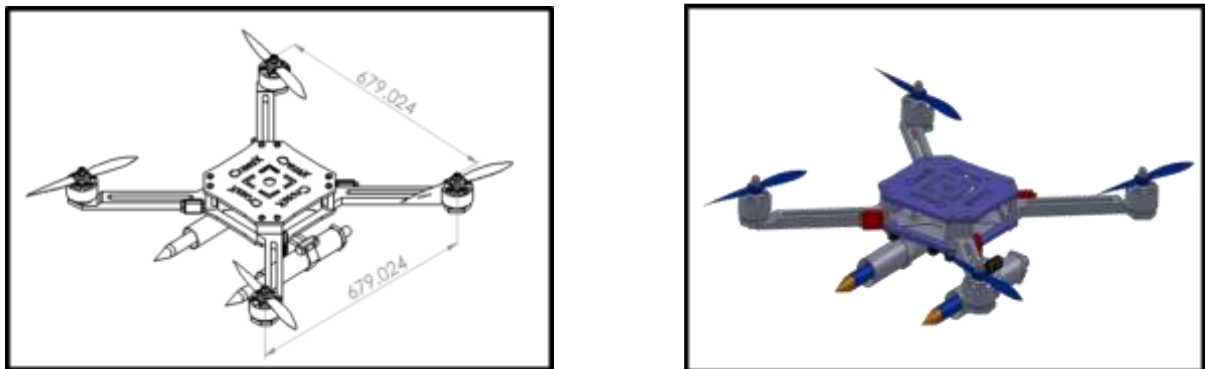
Design of A Rotary Wing Uav Rotary Wing Anti Jamming Quadcopter Type
